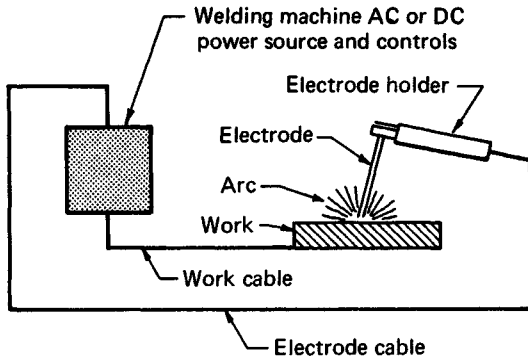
The basic arc-welding circuit. (The Lincoln Electric Company.)
